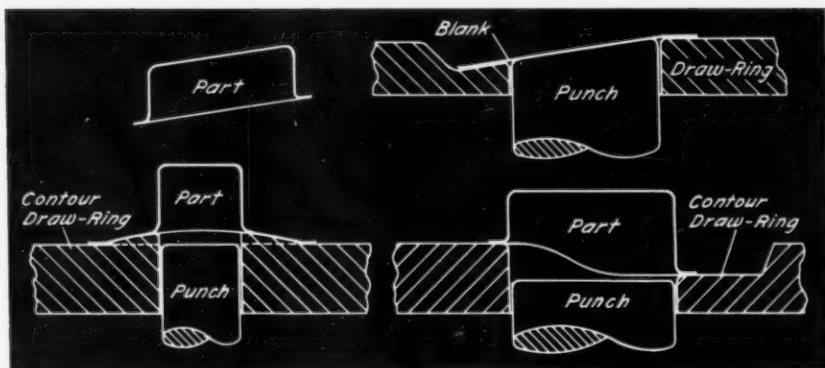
Plate can be placed on top of existing draw-ring for Hydroforming relatively few parts. Rubber strips are placed on top of blank.
